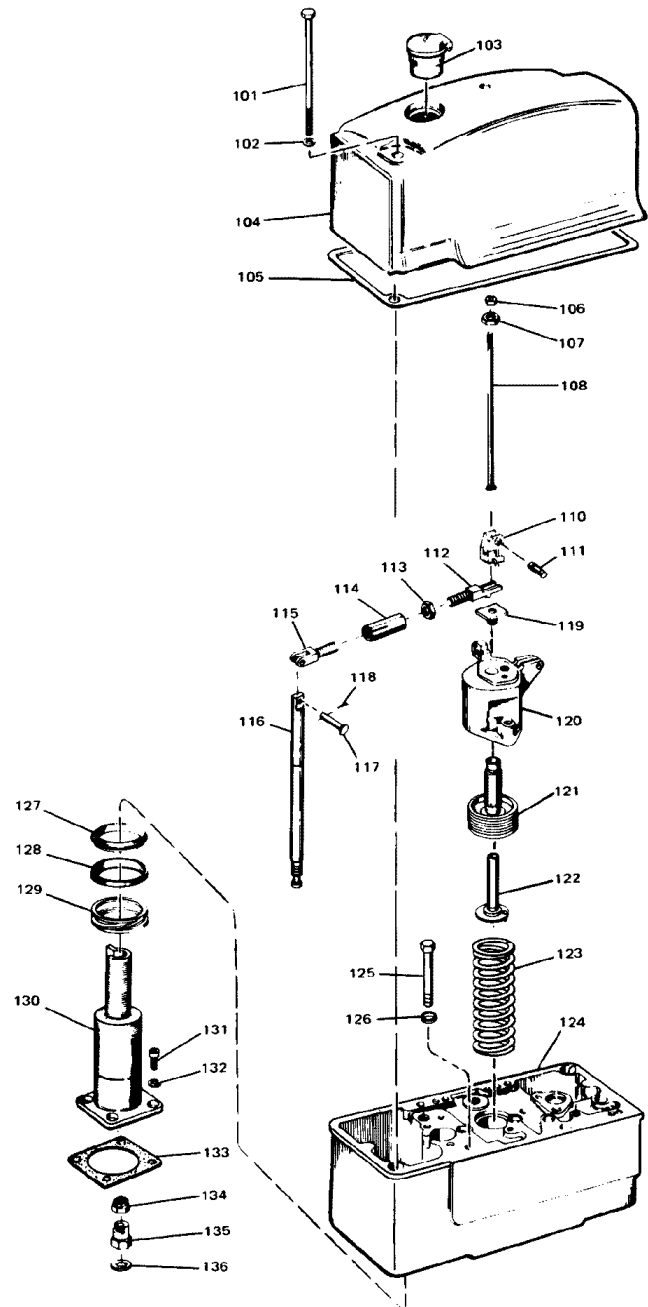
Exploded View of Turnbuckle Speed Droop Linkage
